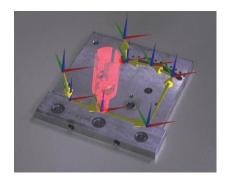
The AR (Augmented Reality) environment for robot tool path teaching. The virtual tool is overlaid on the real workpiece image to help users better visualizing the tool movement during robot teaching.
